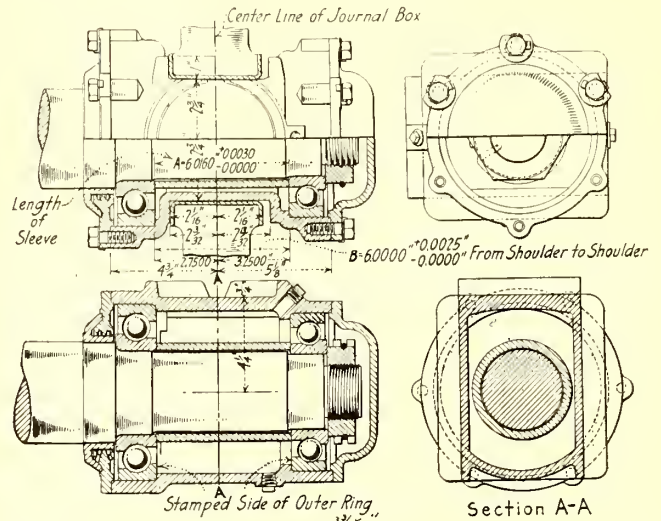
BALL BEARING AND HOUSING FOR USE ON ELECTRIC RAILWAY CARS
